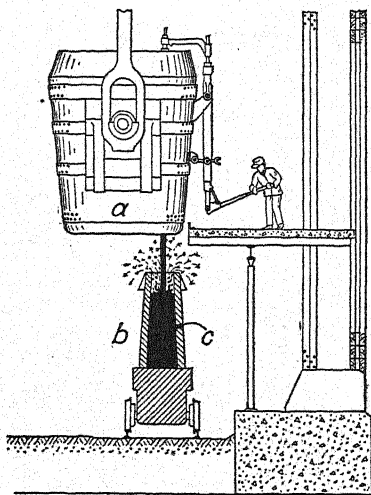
Teeming molten steel into mould. *a.* Ladle. *b.* Ingot mould. *c.* Ingot. (Courtesy of Minnesota Steel Company.)
